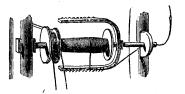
Spindle, Bobbin, and Winding-arm on a larger scale.
